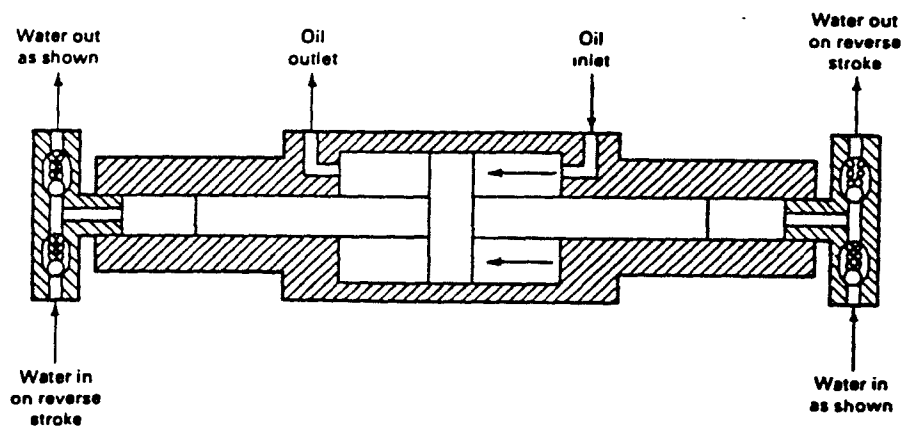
Cross-sectional view of the pressurization of water to 414 MPa (60 ksi) using the fluid pressure intensifier principle
